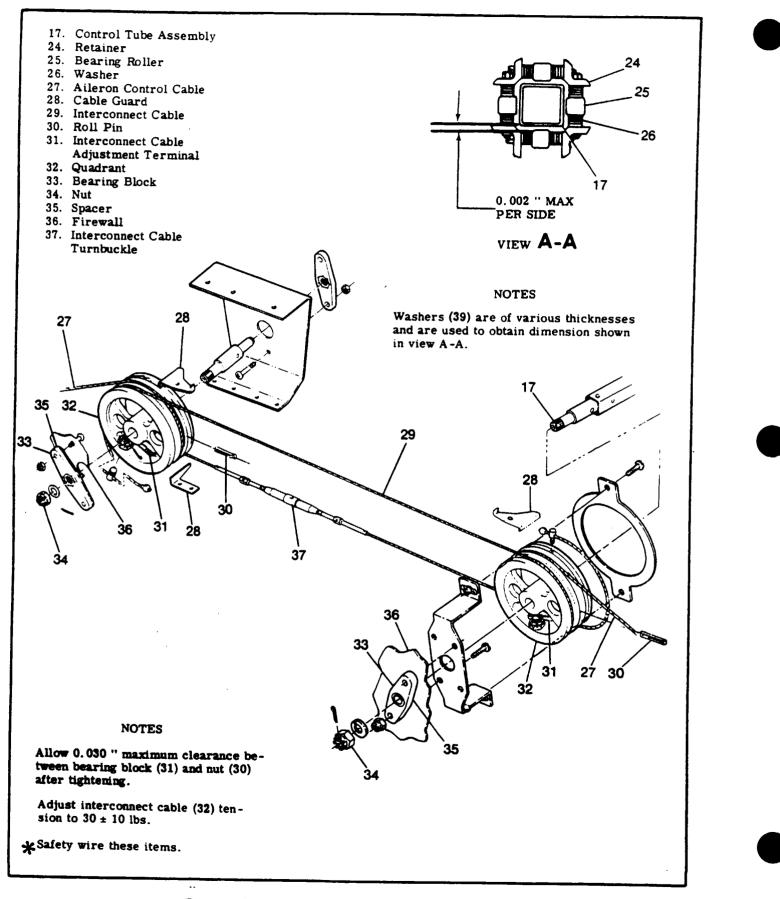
Control Column Installation (Sheet 2 of 3)
